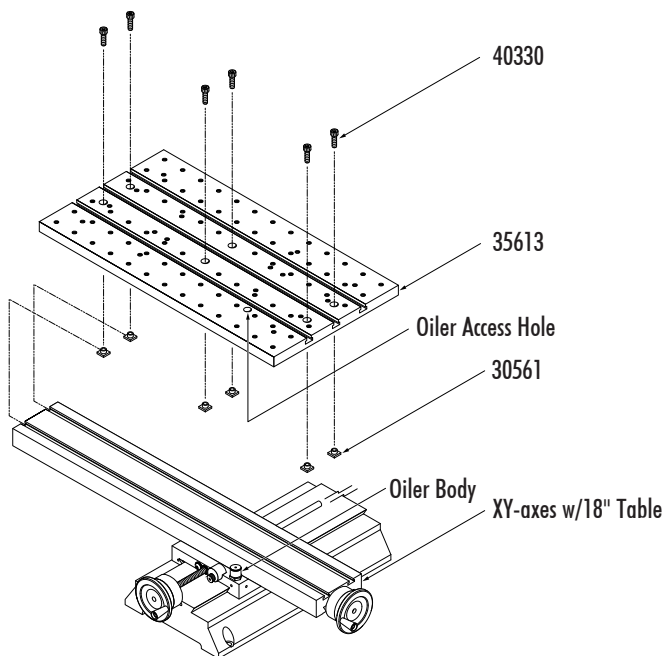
The tooling plate must be mounted with the oiler access hole in the front of the machine in order for it to align to the oiler body.
